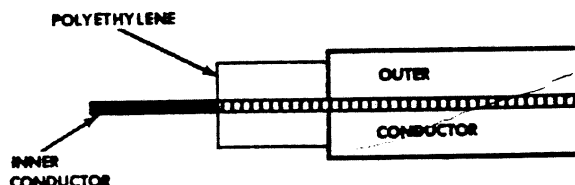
Sectional View of Solid-Dielectric Coaxial Cable
